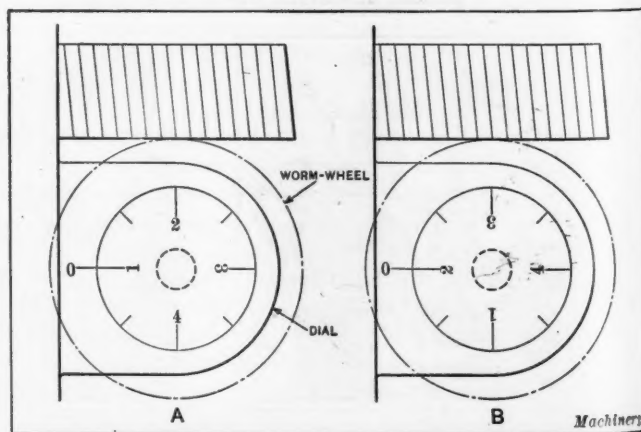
Diagrams illustrating Arrangement of Thread Chasing Dial or Indicator
